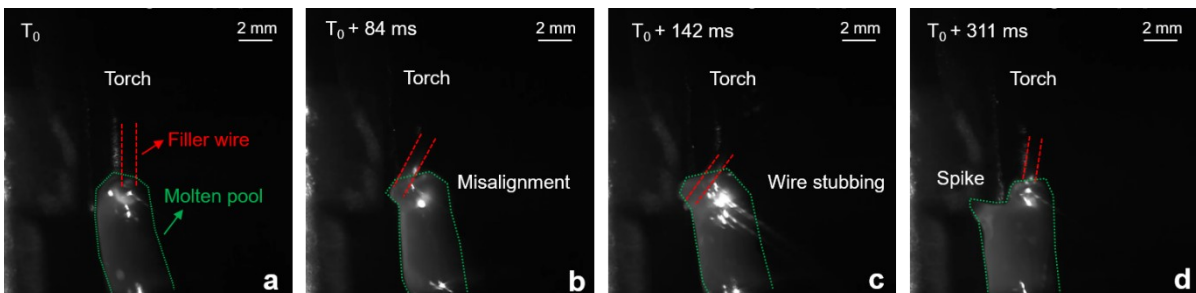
High-speed images of wire stubbing defects ($D \leq 0$ mm).
